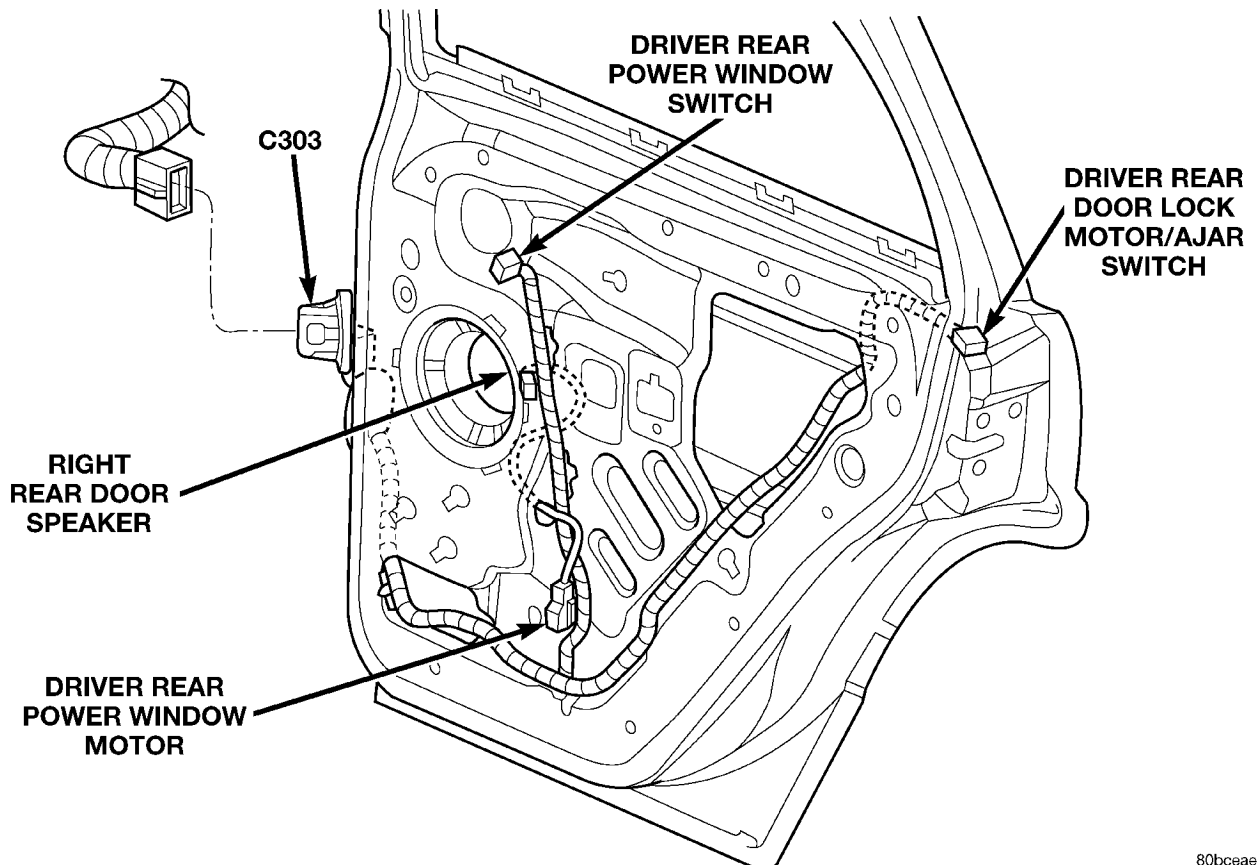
Door Connections (Rear Door, Driver Side) — RHD
